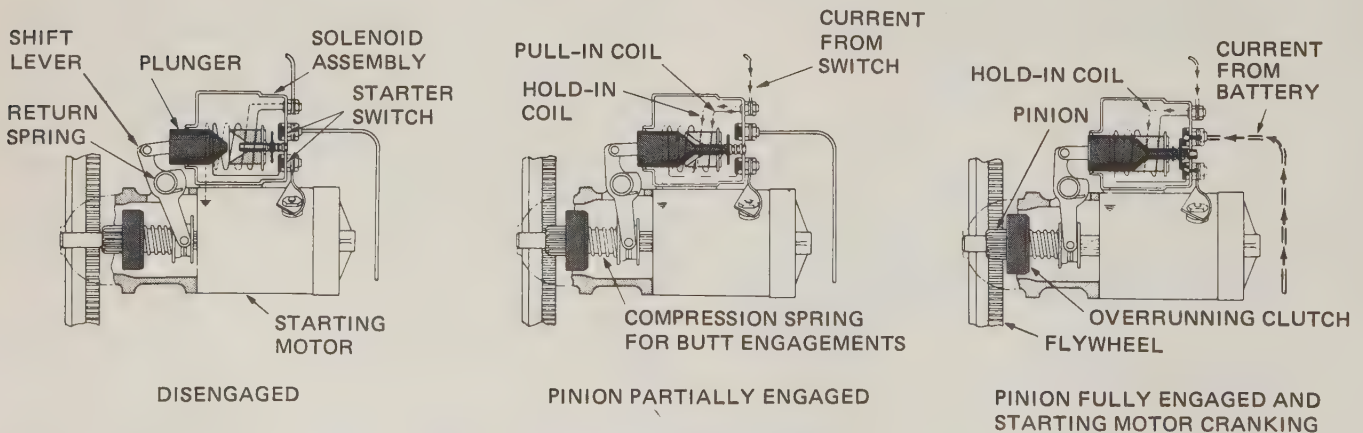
Actions of the solenoid and overrunning clutch as the pinion engages. (Chevrolet Motor Division of General Motors Corporation)
